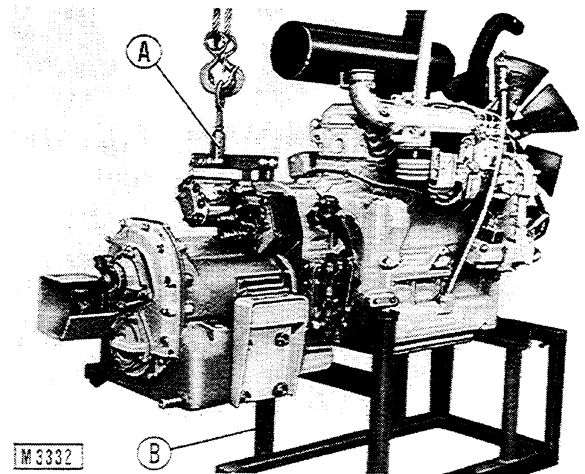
Engine - transmission assembly in position on stand 75297150 (B)
